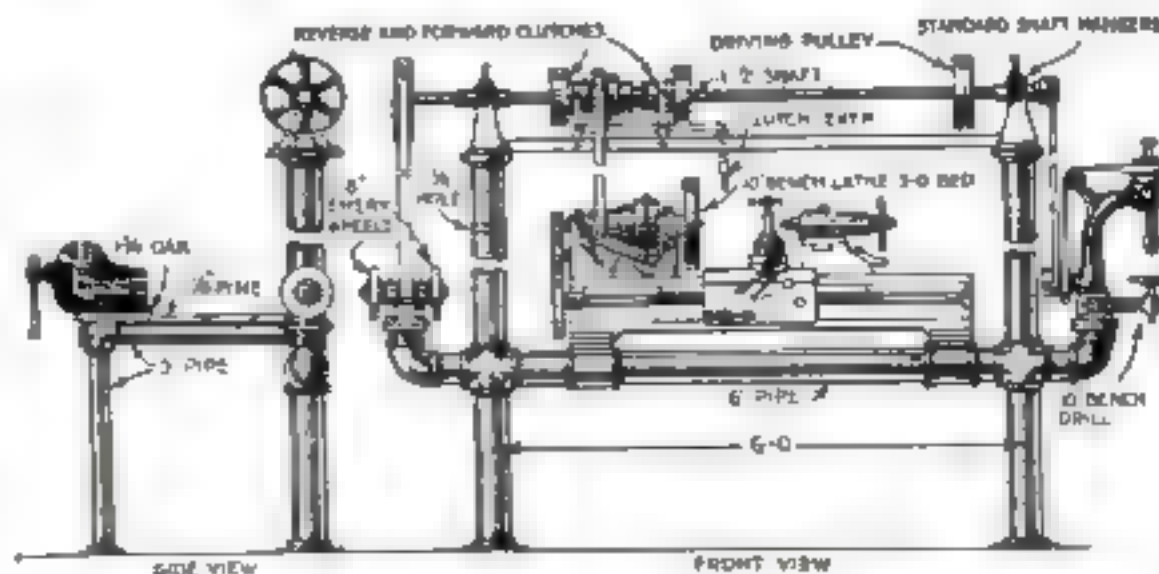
Side and front views of the motorized workbench arranged for a 10-in. bench lathe, a bench drill, and a grinder, together with the necessary counter-shaft. The entire bench requires less than 40 sq. ft. of floor space
